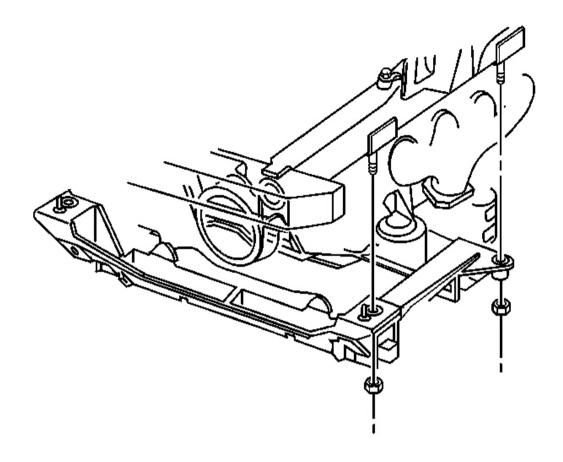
Crossmember & Mounting Nuts Courtesy of GENERAL MOTORS CORP.
